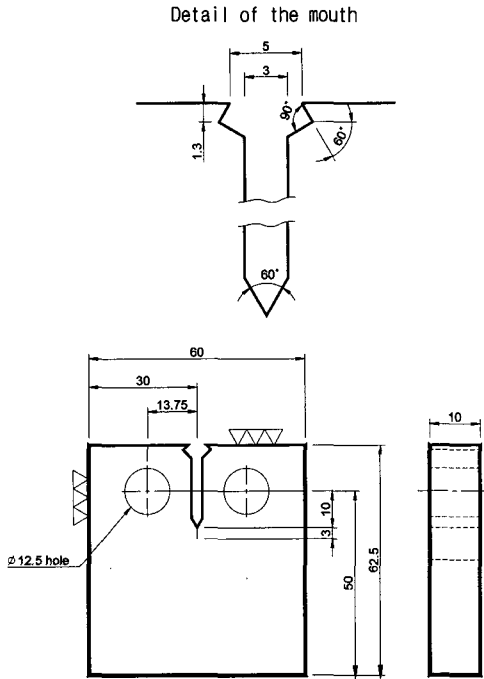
Standard compact-tension C(T) specimen for fatigue crack growth rate testing.
